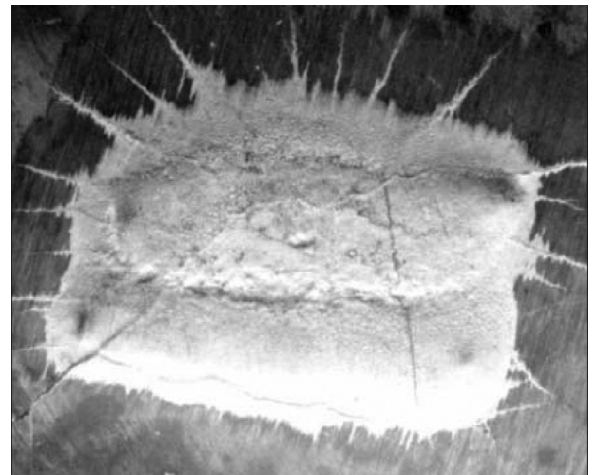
Specimen of silver based Inconel alloy 718 showing stress-corrosion cracking [9].
